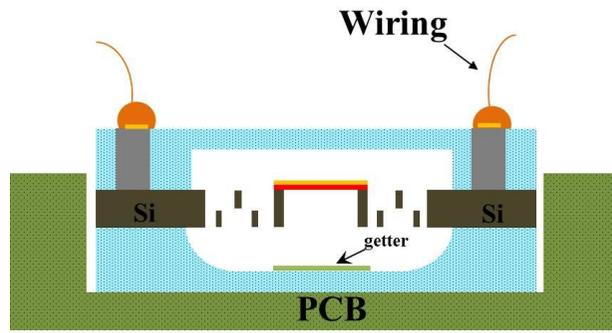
Attachment of packaged SiN scanner to PCB and wiring
